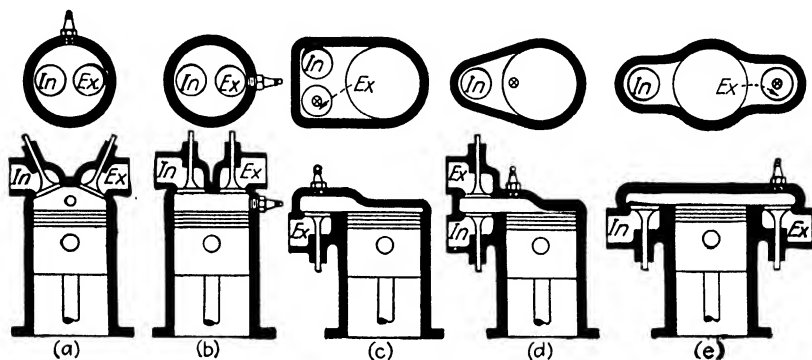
Cylinder-head and valve arrangements. (a) Valves in head, inclined. (b) Valves in head, vertical. (c) L head. (d) I' head. (e) T head. (All pistons are shown in top-center position. X in top view indicates spark-plug location.)
